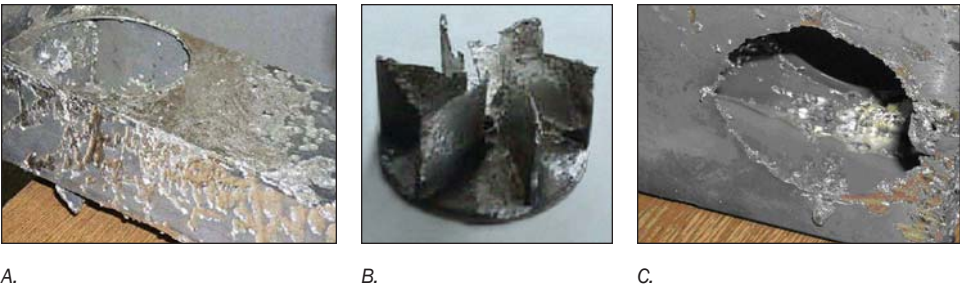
Wave solder equipment damaged by Pb-free solder [10, 16].
